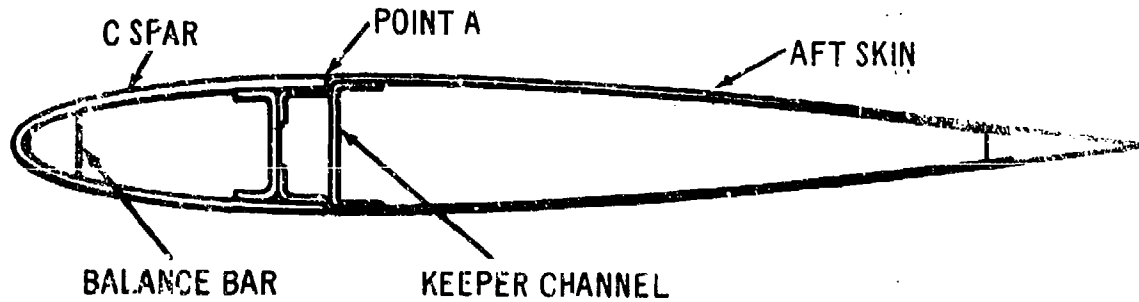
Typical Rotor Blade Design — Alternate 1
